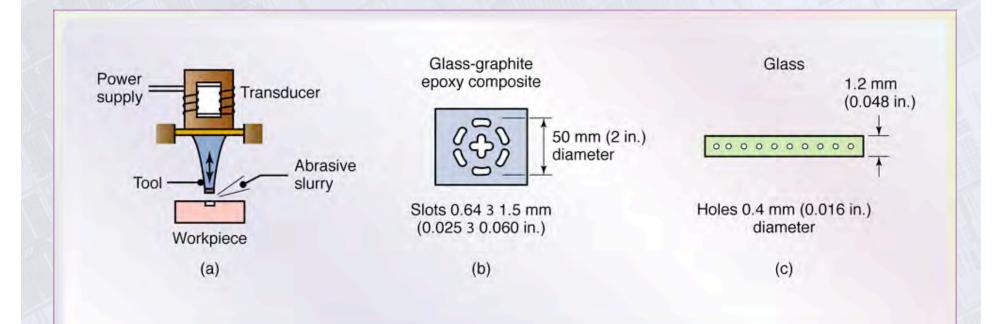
(a) Schematic illustration of the ultrasonic machining process. (b) and (c) Types of parts made by this process. Note the small size of holes produced.
